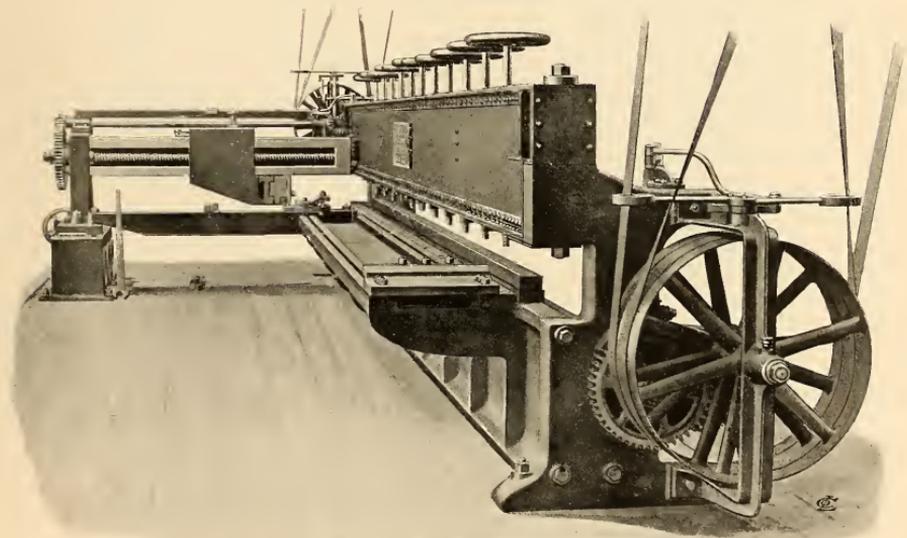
PLATE-PLANING MACHINE—FOR PLATES 22 FEET LONG.
